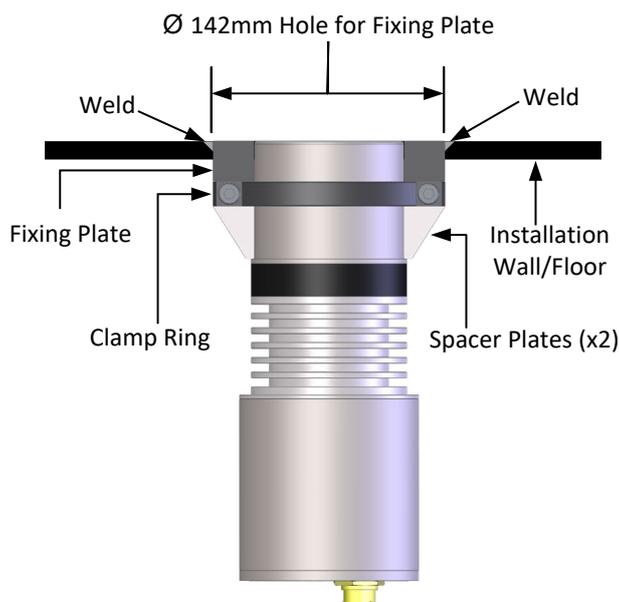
Sensor Installation (Fixing Plate Flush mounted)
